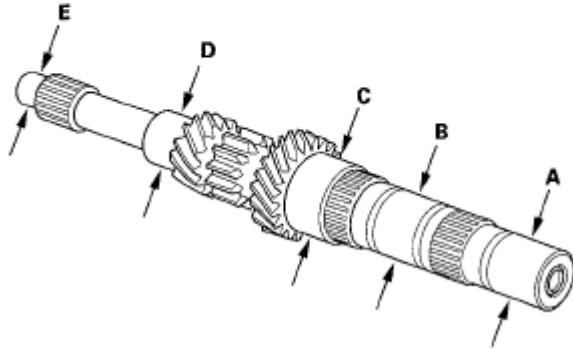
Inspecting Mainshaft Gear And Bearing With Specifications
